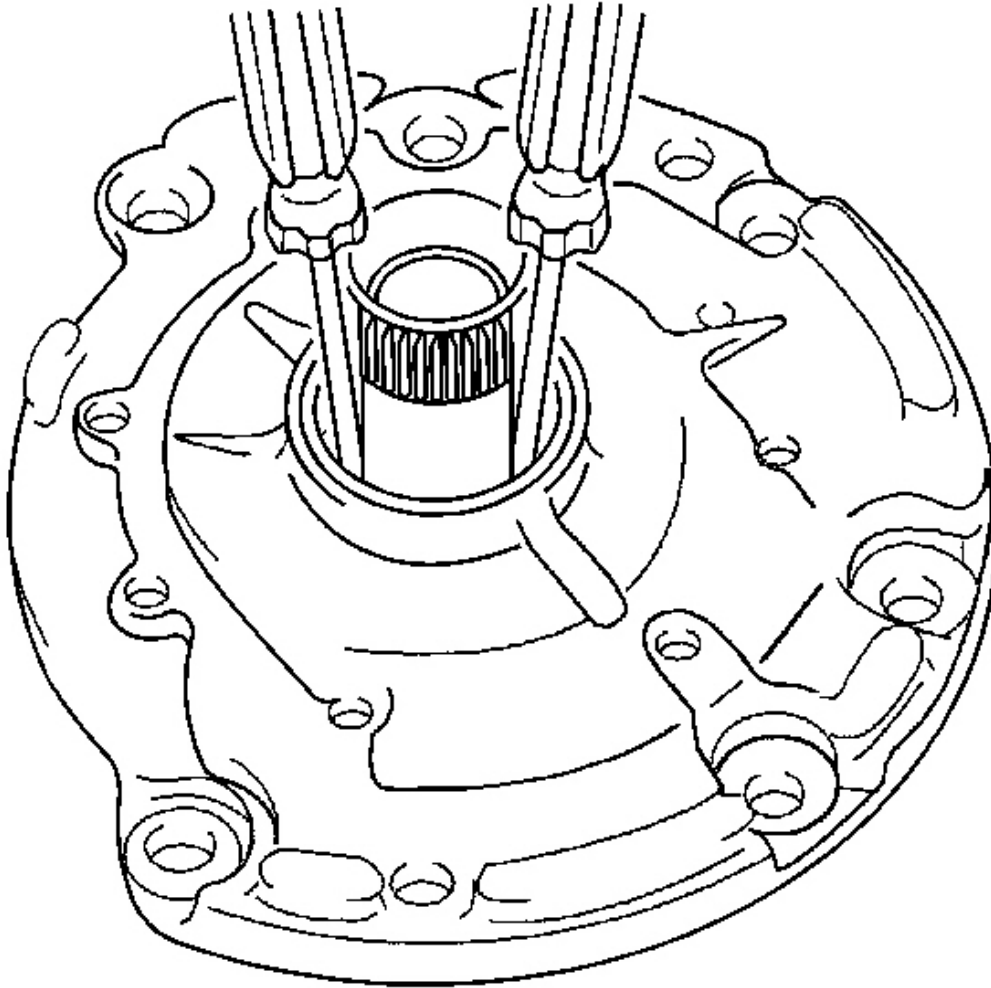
Turning Drive Gear With 2 Screwdrivers
